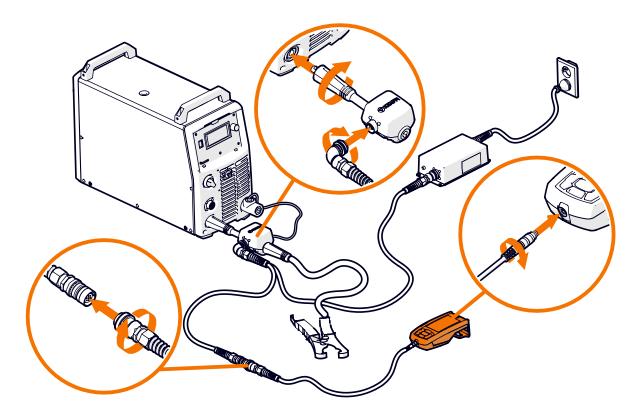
Connecting ARC Universal Adapter TIG and Smart Reader to a welding machine
